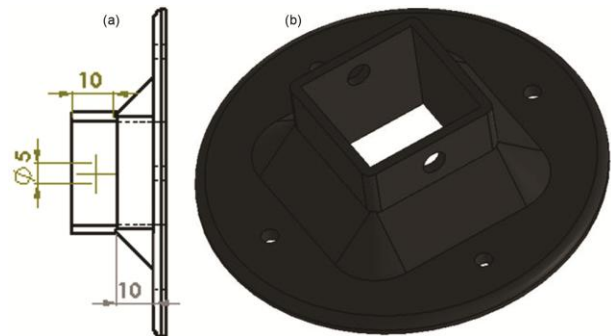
CAD of square guide for a drum (a) side view, and (b) isometric view of drum.
